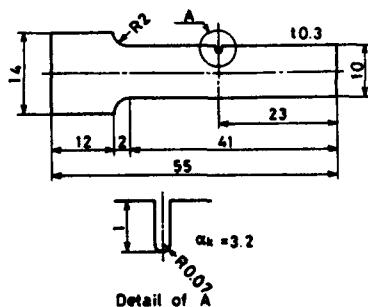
Shape and dimensions of fatigue specimen (in mm).
